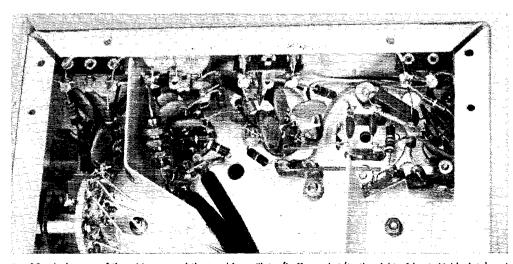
A close-up of the wiring around the tunable-oscillator/buffer socket (to the right of bent shield plate) and the crystal-oscillator/buffer socket in the upper left corner. The metal center post of the socket is connected to the chassis through a soldering lug fastened under one of the socket mounting nuts; this is the single ground point for the stage. The same method of grounding is used in each stage. Disk capacitors are directly over the sockets to shield the oscillator and buffer sections from each other.
